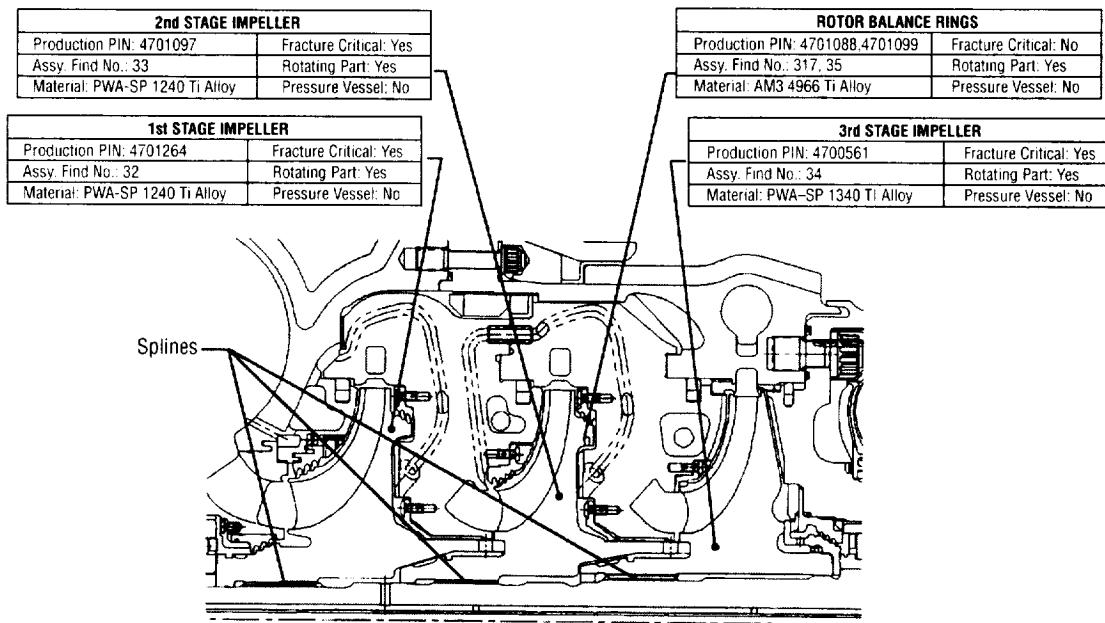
Cross section of the Pratt and Whitney AT/HPFTP pump end showing the impeller locations.
